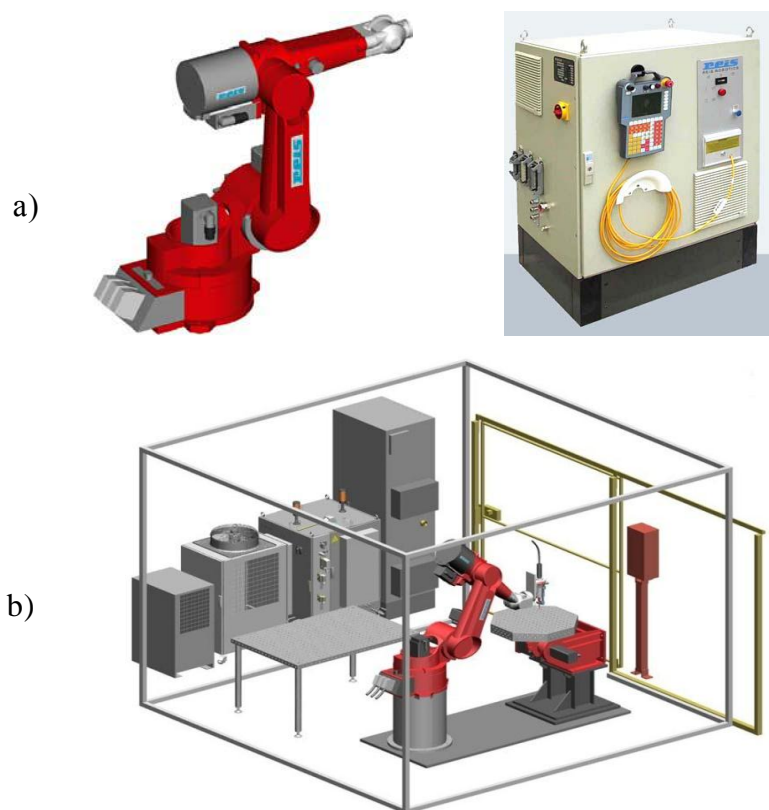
a) Image of the robot REIS RV60-60 (Reis Robotics, - Germany) and (b) the general arrangement of the equipment for laser welding
